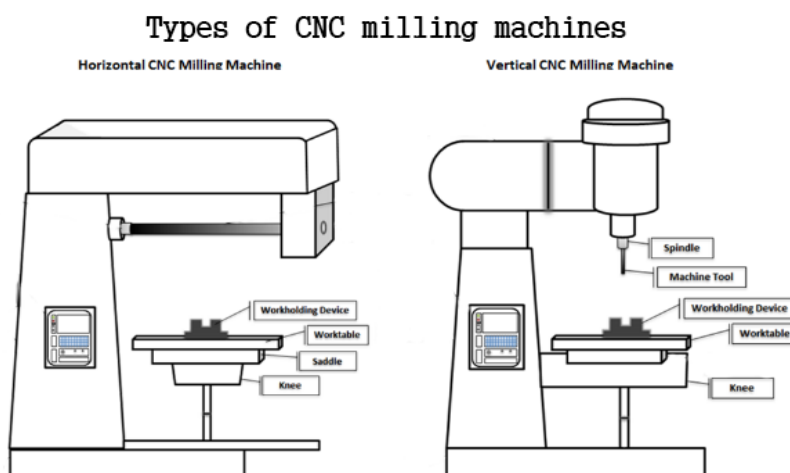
Types of CNC milling machines (adapted from Theias 2019)
